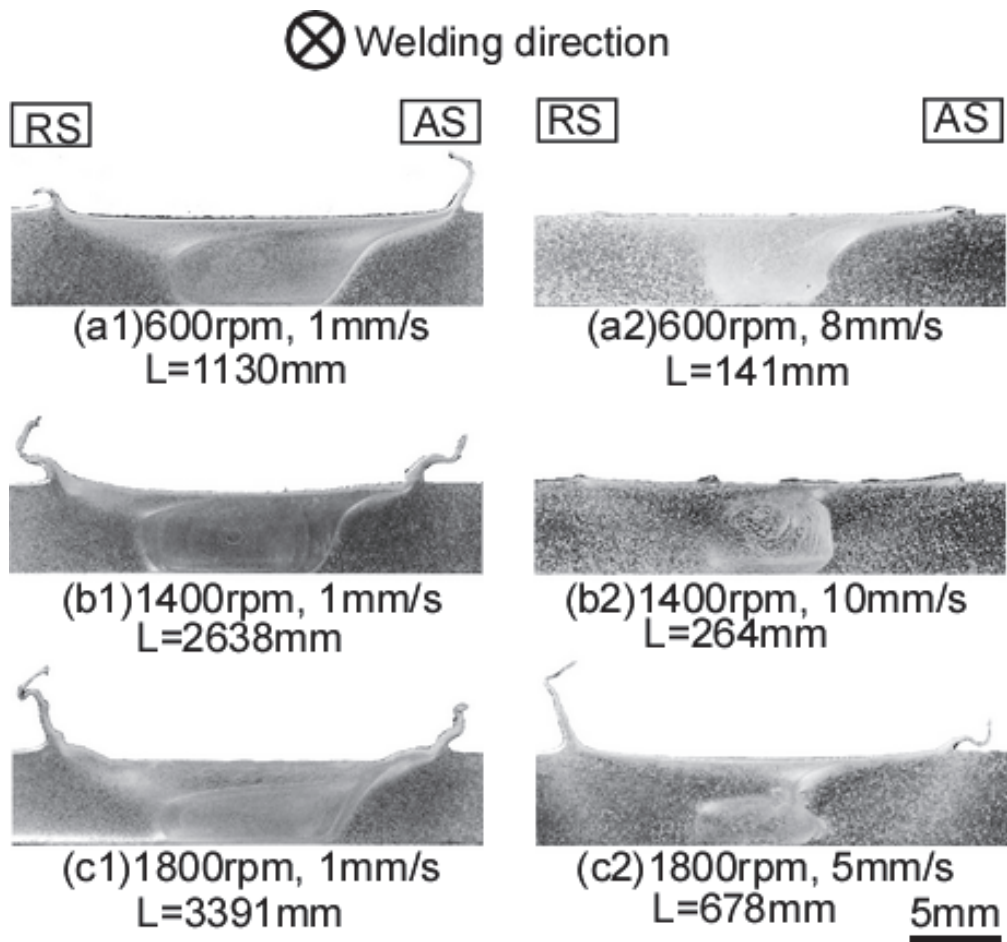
Macrostructures of FSW joints welded under various conditions.
